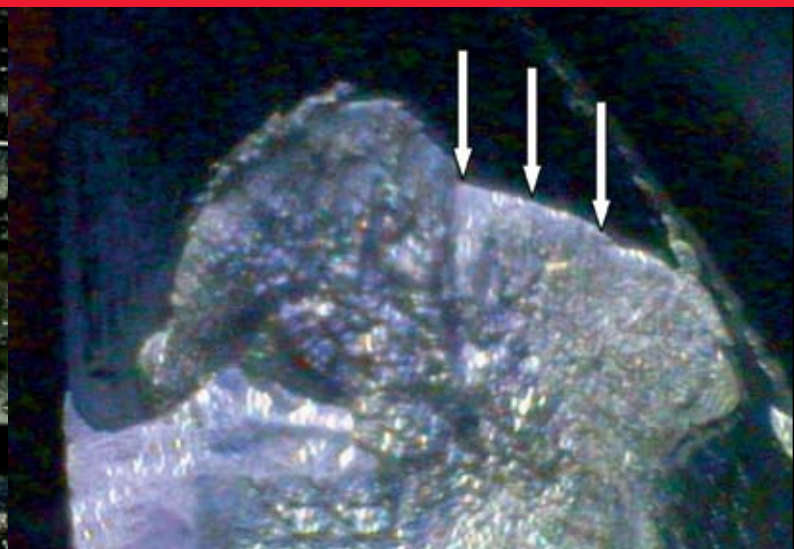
The gear oil ADDINOL Eco Gear 320 S has been used now for 20,515 hours in the same gearbox of the wind mill. Surface and edges of pitting have been smoothed, further breakouts could be prevented, and there are no bearing damages in this gear unit.
